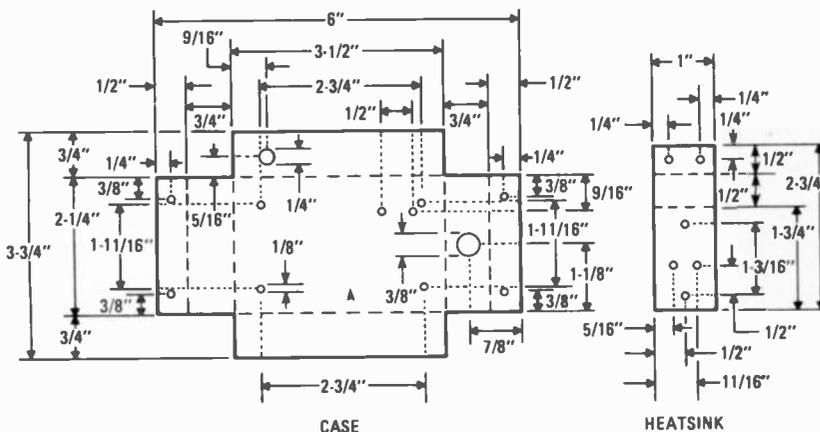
THE CASE AND HEATSINK can be fabricated from easily worked tinplate or other sheetmetal. The heatsink transfers the heat generated by the power transistor to the surface of the metal case.
